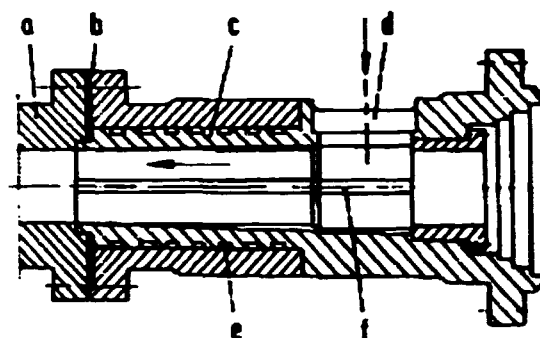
High efficiency feed zone (a) extruder barrel, (b) thermal break, (c) grooved sleeve, (d) feed opening, (e) cooling spiral, (f) grooves.
